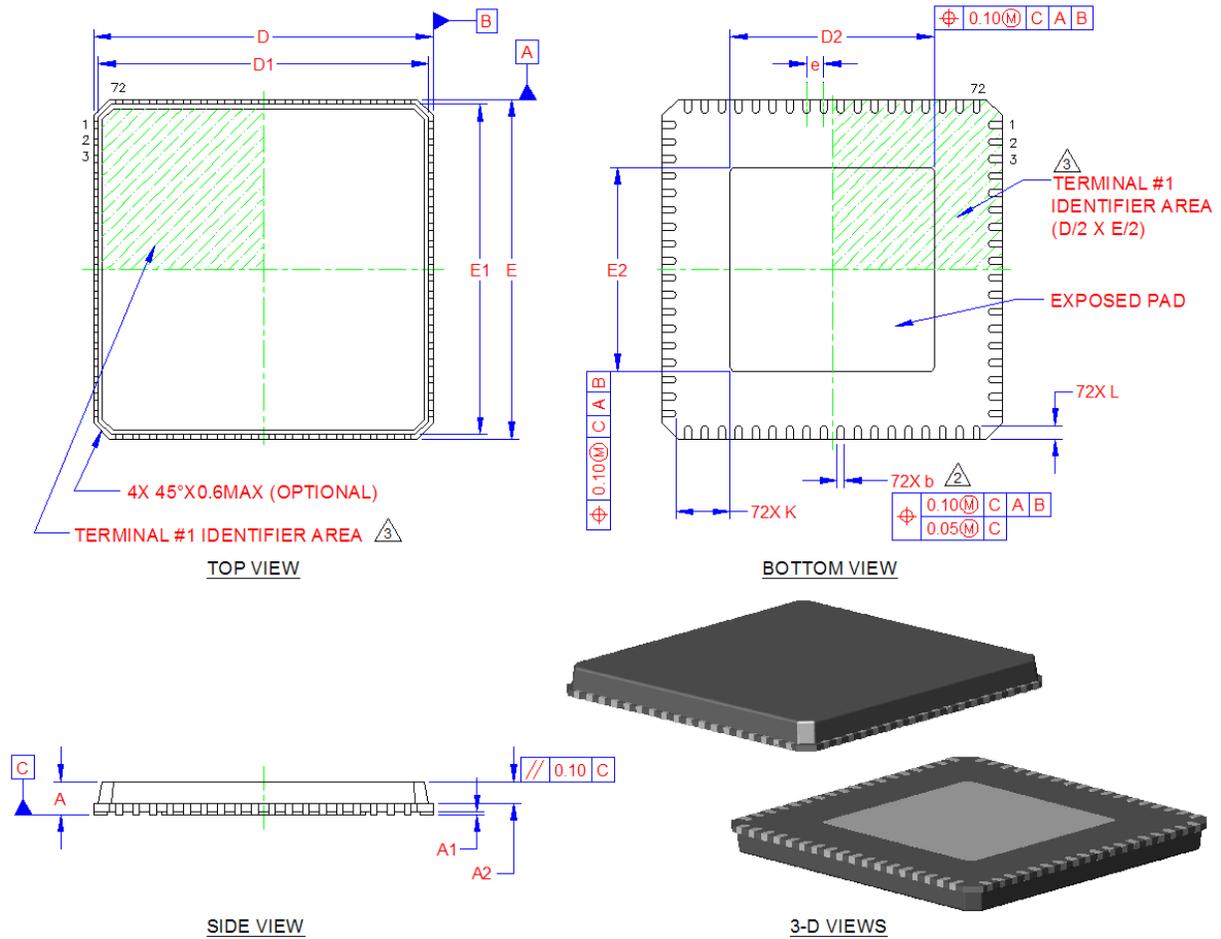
SEC2410/SEC4410 72-Pin QFN Package Drawing
